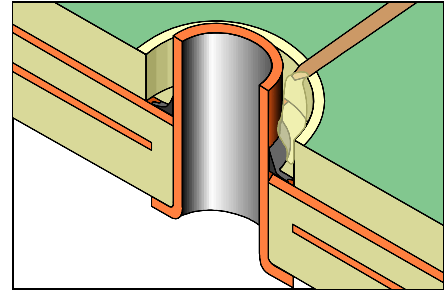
Fill the milled hole with the epoxy up to, and level with, the surface of the board.
